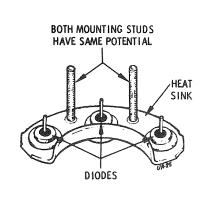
RECTIFIER DIODE ASSEMBLY
